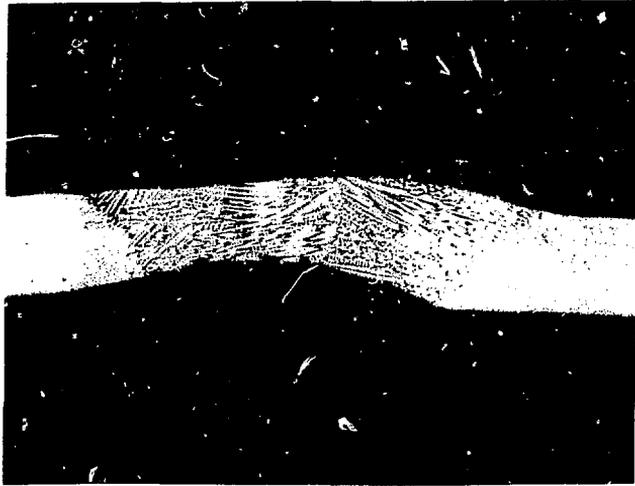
MISALIGNED EDGES OF WELDED GERMAN MILL TUBE
